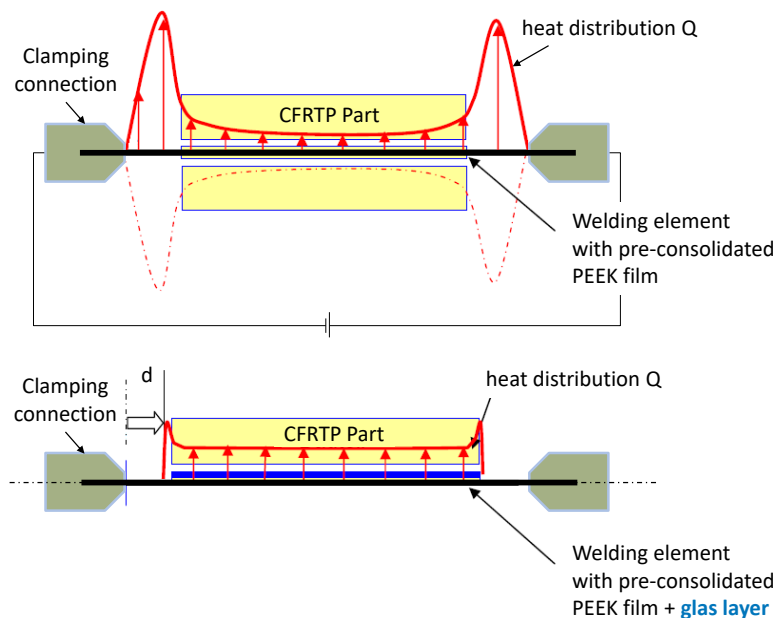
Schematic illustration of edge effect depending on different welding element insulations (PEEK, top; GF/PEEK, bottom) and clamping distance (adapted from Ref. [10])
